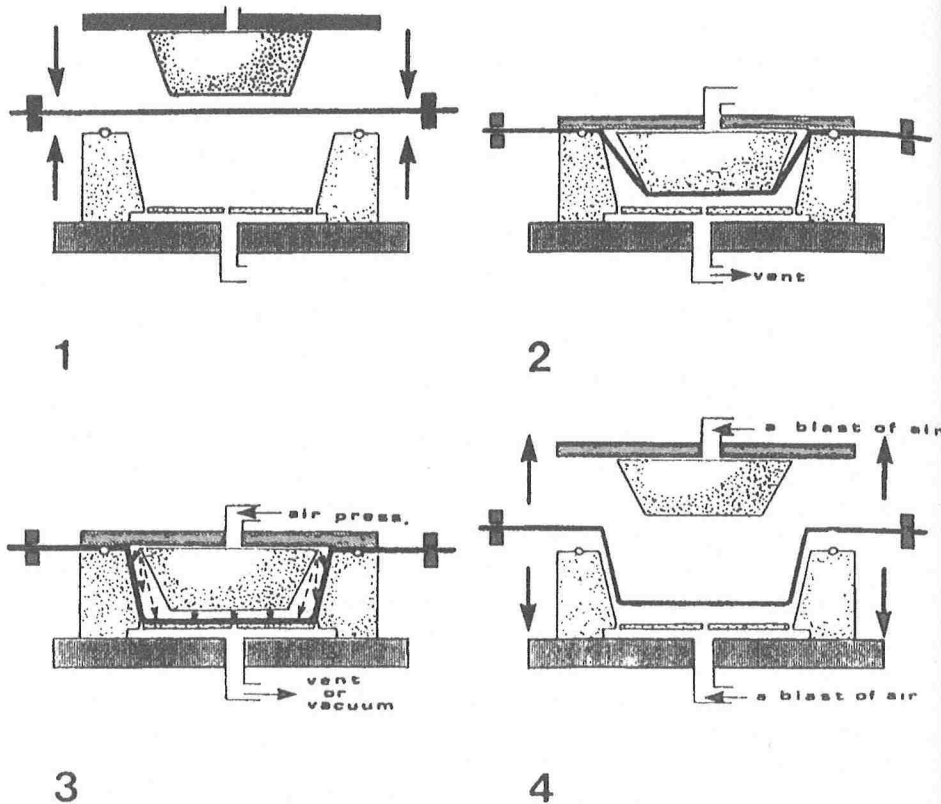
Plug assist thermoforming: (1) sheet clamping; (2) prestretching; (3) forming; (4) mold opening and stripping.
